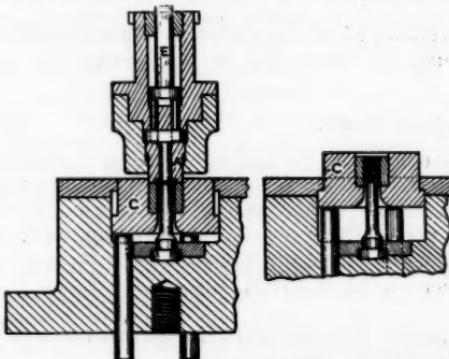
Showing typical Dies for making Hot Brass Pressings.
